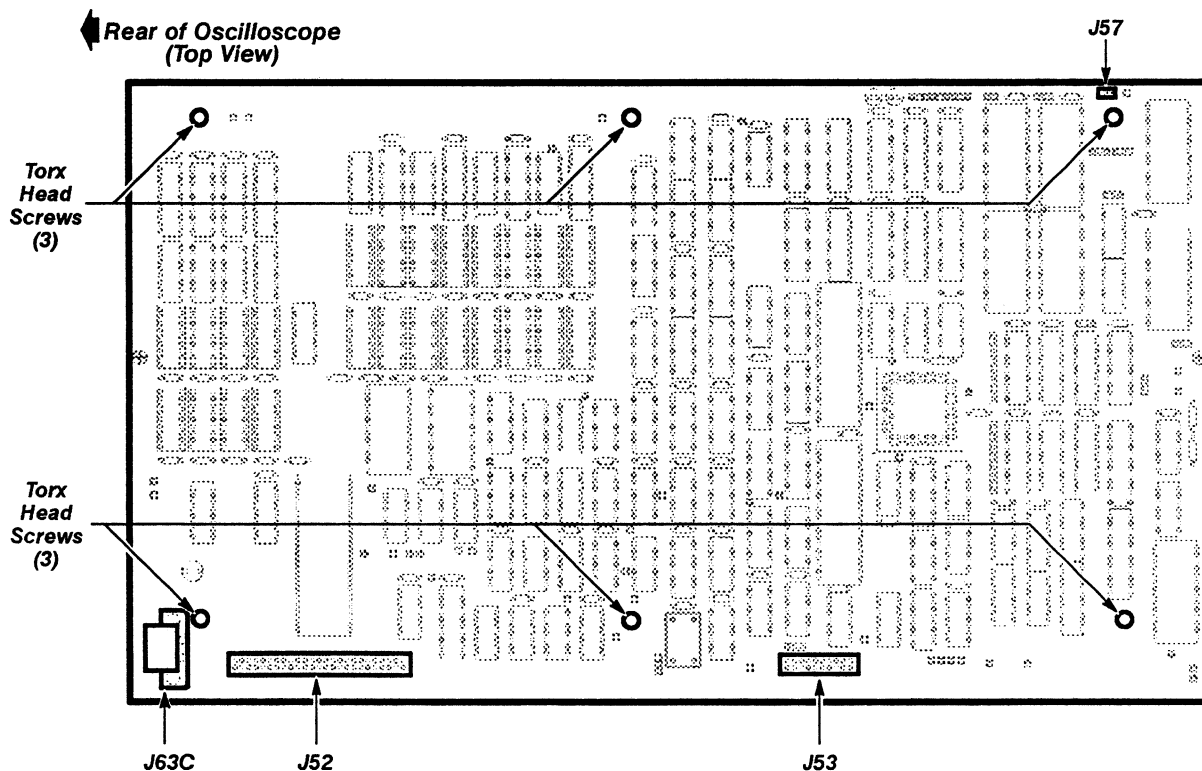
Removing and Replacing the A7 Display Controller Board
